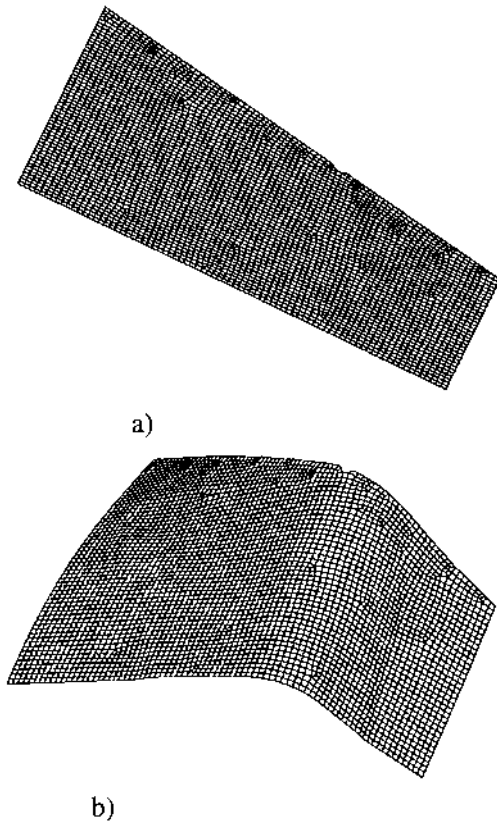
(a) Blank and (b) binder wrap sheet shapes.
